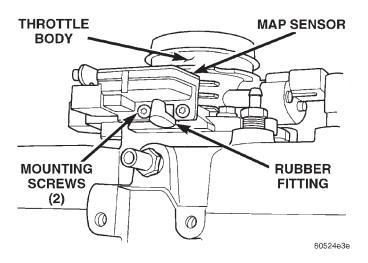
Rubber L-Shaped Fitting—MAP Sensor-to-Throttle Body
